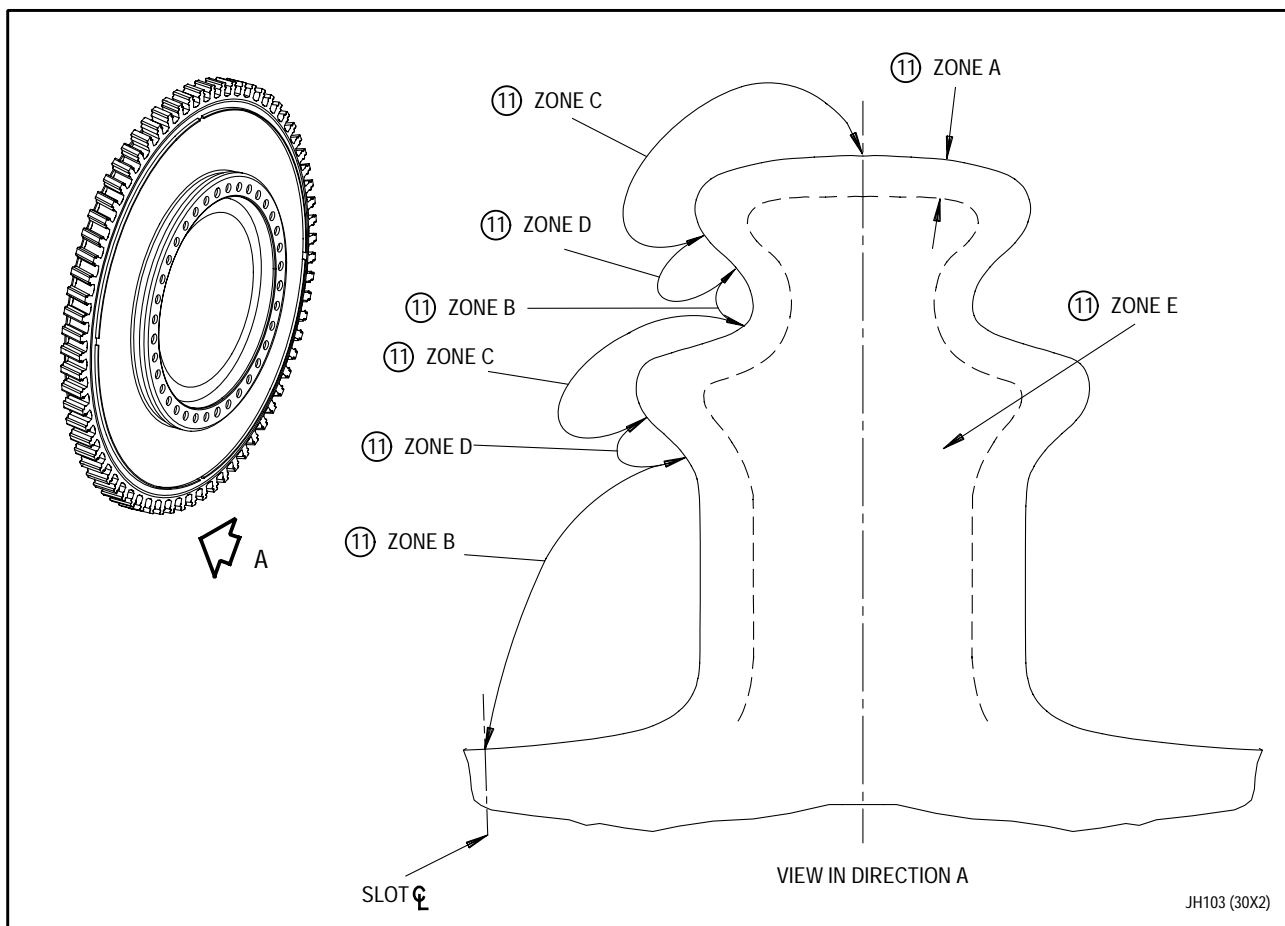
First Stage Turbine Disk - Inspection (Sheet 3 of 3)
